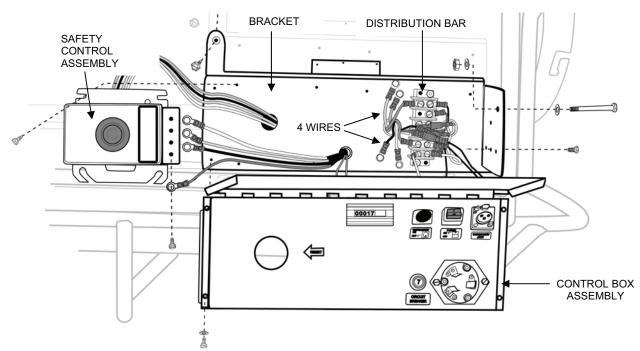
Diesel Heater Safety Control Assembly Replacement.
